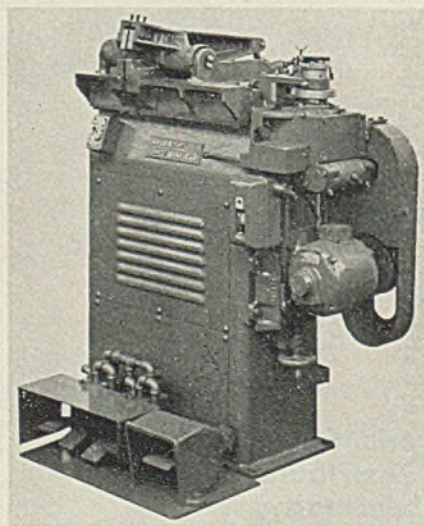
Unit similar to that in Fig. 7 but adapted for butt-flash welding of clevises and other fittings to control tubes or rods. Foot lever controlled
